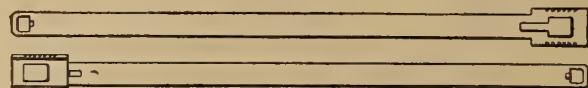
CENTRAL CAST IN CROSSWISE STAMPED ENCASED LEAD SEAL WITH EYELET RIVET.
